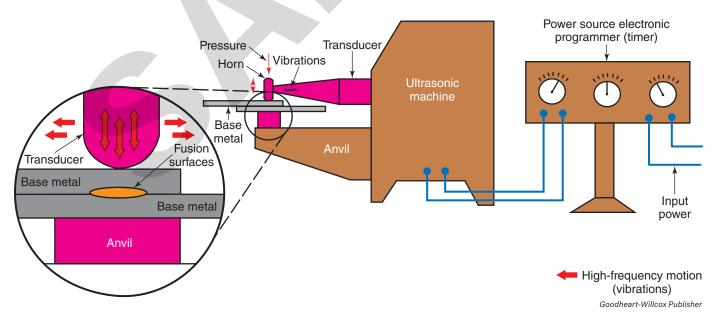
Ultrasonic welding (USW). Welding energy is created by extremely high-frequency vibration of the machine horn. The molecules at the surfaces of the two pieces of base metal are made to move so rapidly that the surfaces fuse.
